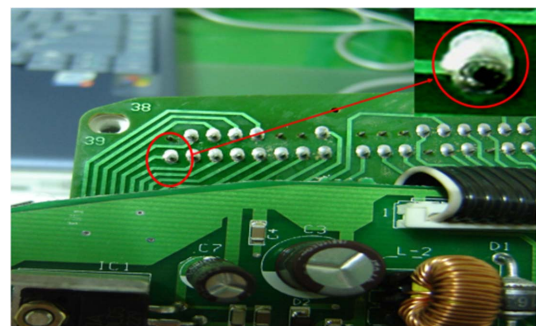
Soldering parts damage example of instrument panel inside.
